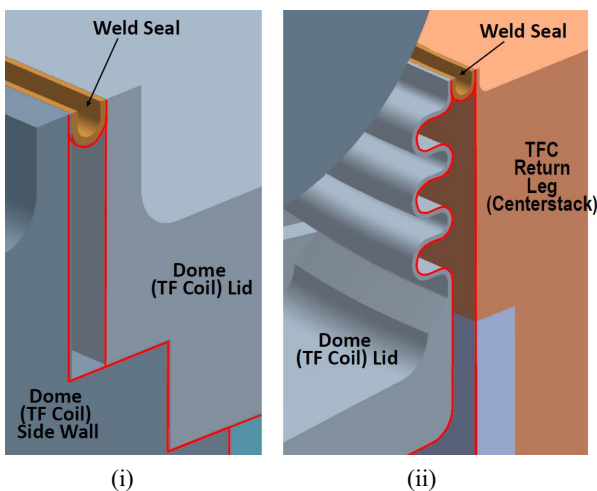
Vacuum boundary and weld seals concepts for the dome lid joining (i) the outer TFC current path, and (ii) the TFC center post.
